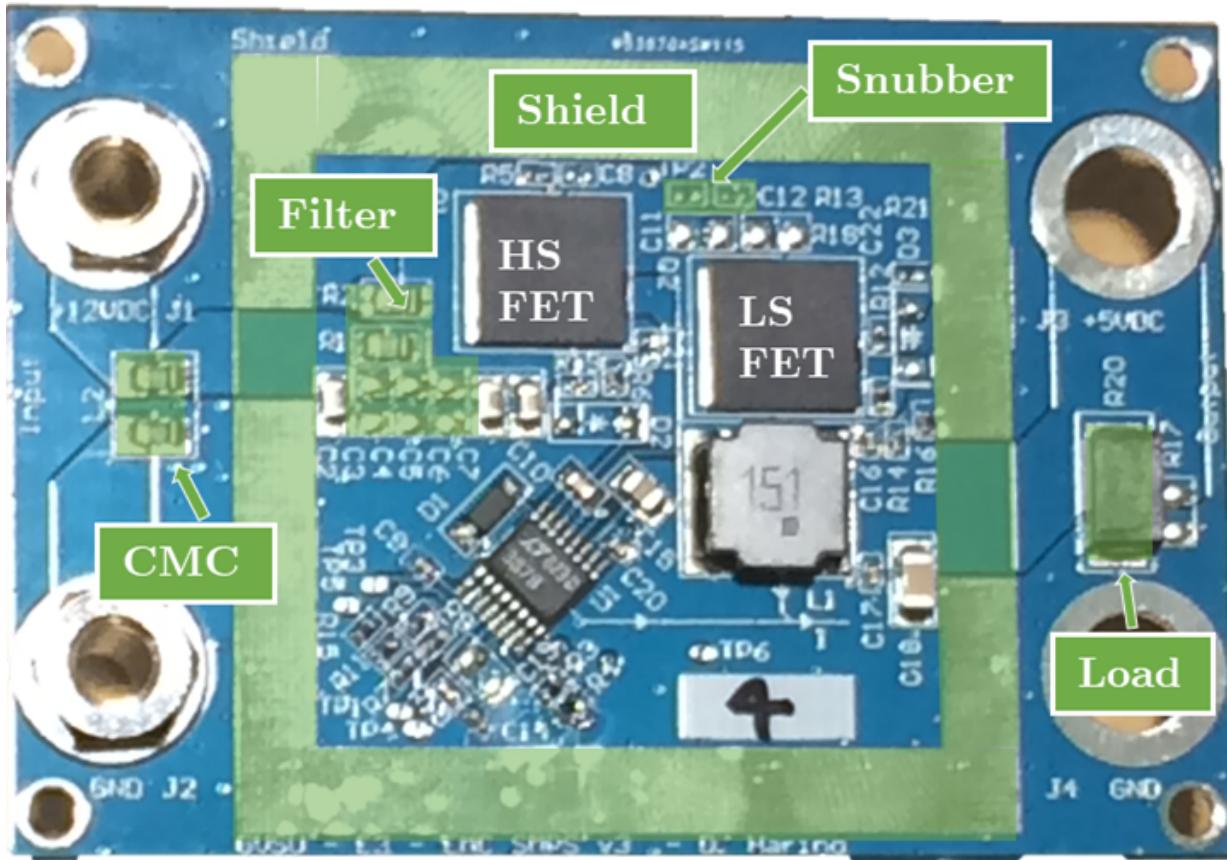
SMPS v3 board number 4 with highlighted footprints that illustrate the places where the board will be modified during measurement.
